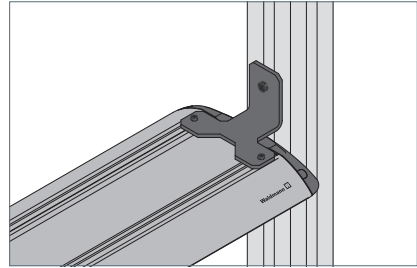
Mounting the luminaire of mounting type "Lateral".
